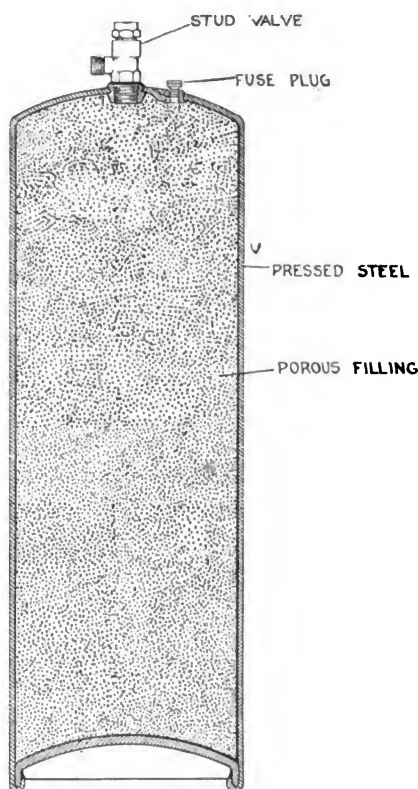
SECTION OF ACETYLENE GAS TANK
